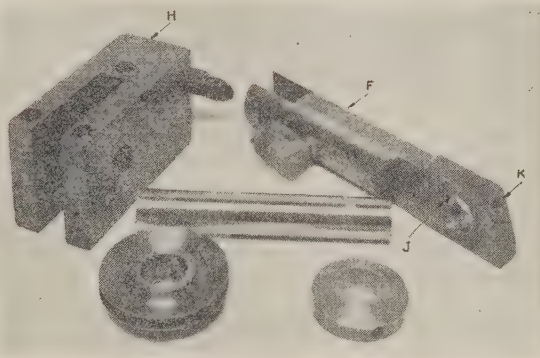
COMPONENT PARTS OF A BEARING TEST
